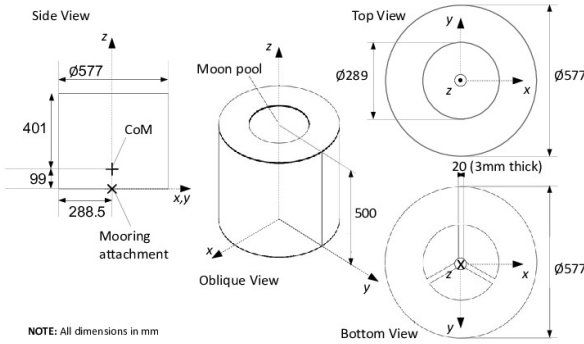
Geometry 2: Cylinder with moon-pool (all dimensions in mm) [1]
